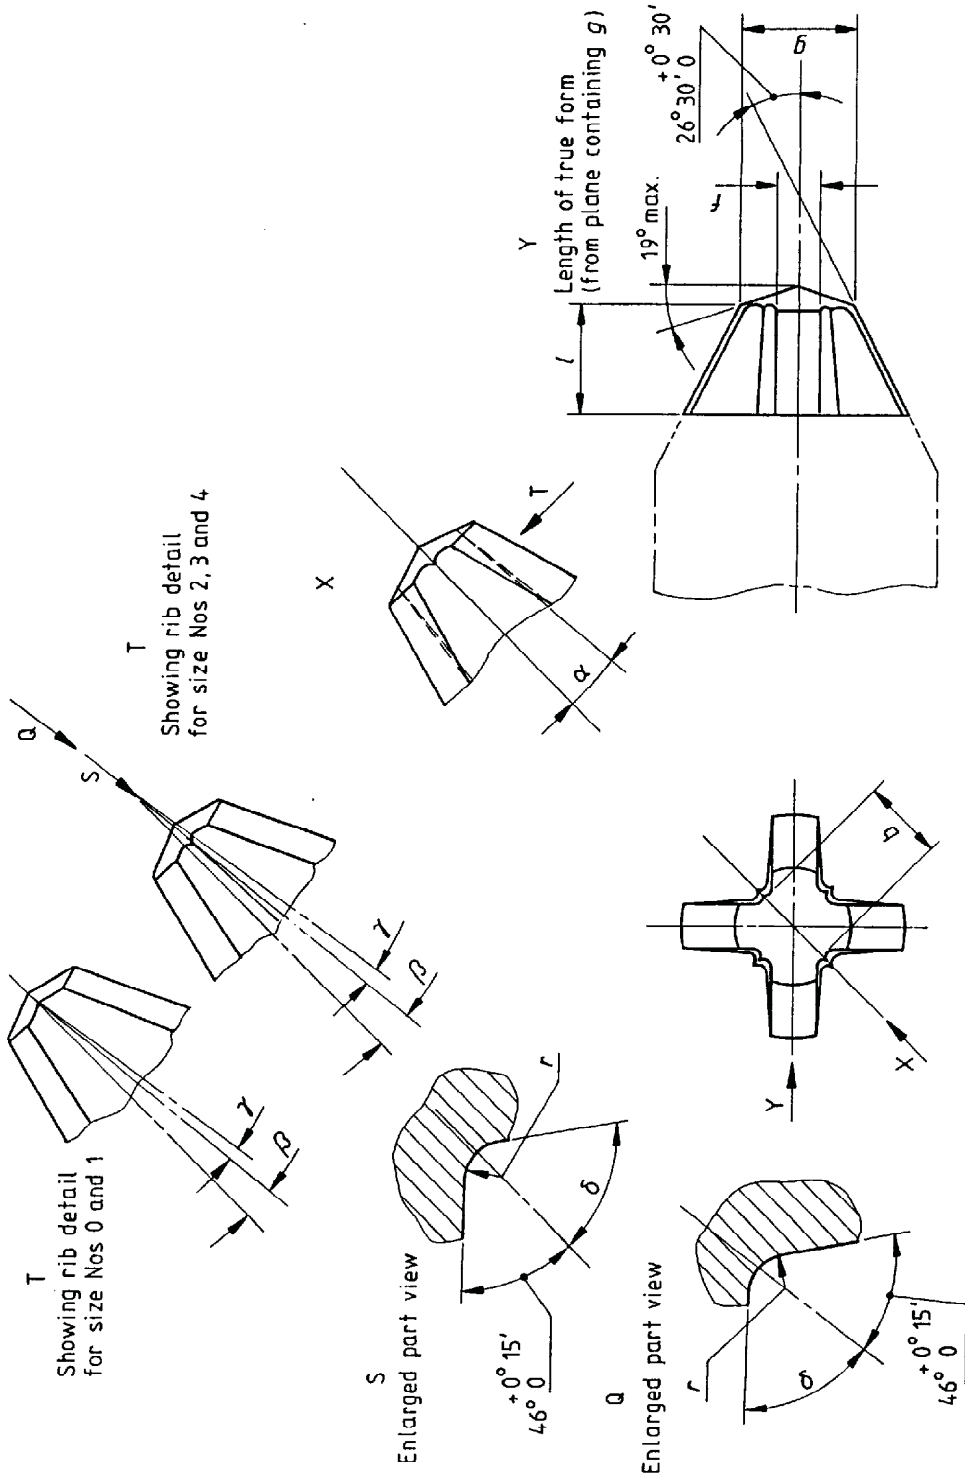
Crossed-recess head screwdrivers: details of point: type SD
